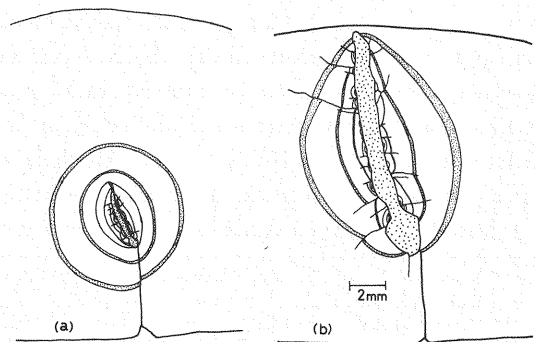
Sketches of fracture surfaces with beach marks.
